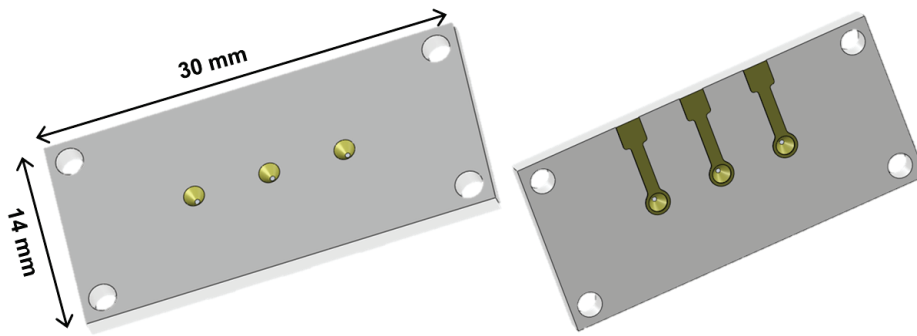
3D view of the 3D PCBs from Cicor (left: top view with conical zipping chambers, right: bottom view with electrical vias and tracks.).
